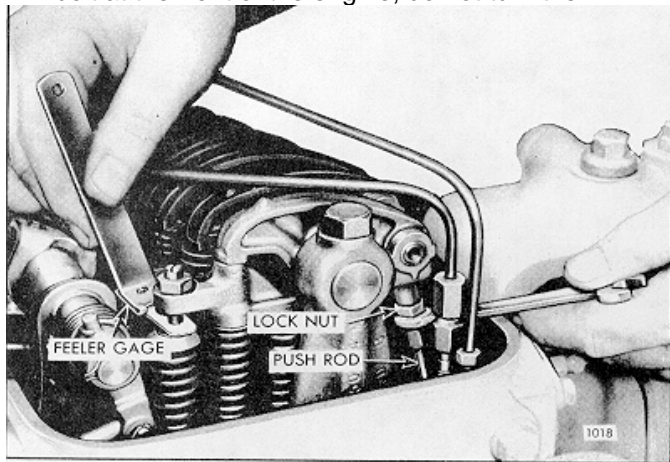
Adjusting Valve Clearance (Spring-Loaded Valve Bridge)
